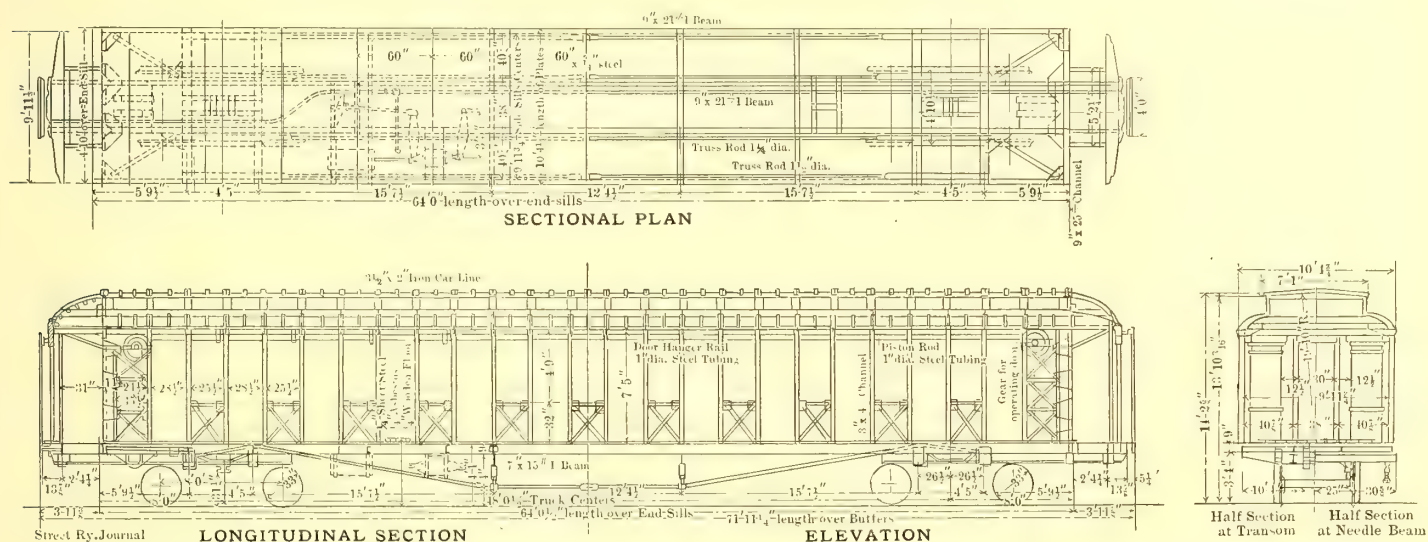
DETAILS OF STEEL-FRAME, SIDE-DOOR PASSENGER CAR CONSTRUCTED BY THE ILLINOIS CENTRAL RAILROAD
